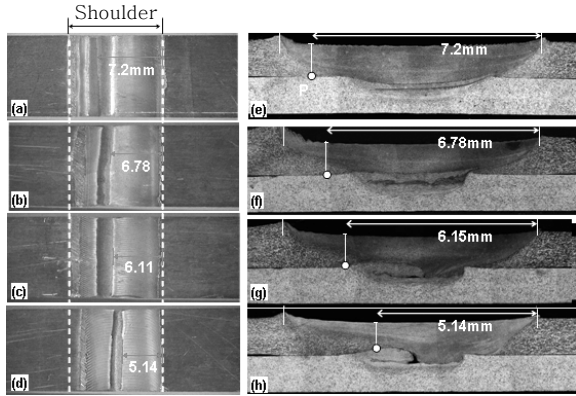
Relation between cross section and macro-structure of fractured specimen with increasing welding speed at the same rotation speed(1000rpm): (e) 100mm/min, (f) 300mm/min, (g) 500mm/min, (h) 700mm/min
